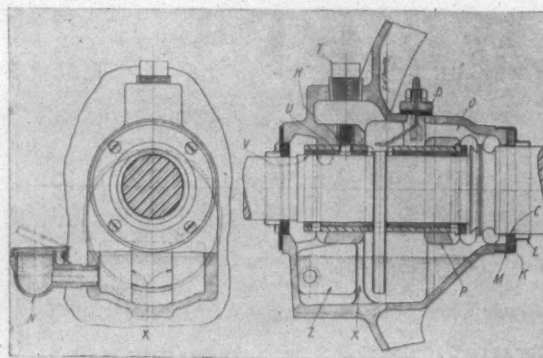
Cross-section of Sealed-Sleeve Bearing
